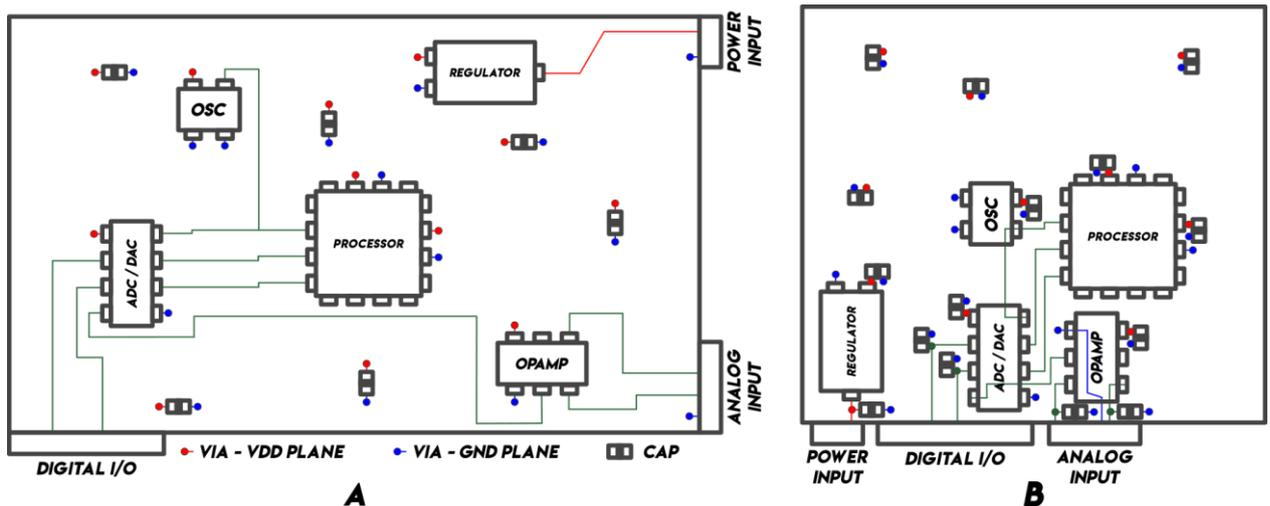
(A) 4-layer PCB design, (B) PCB design in accordance with 4-layer EMC rules.
